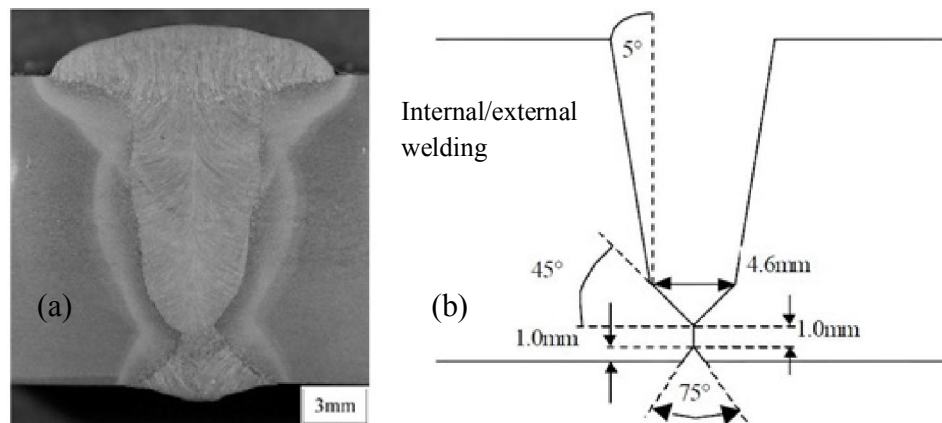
(a) Cranfield automated pipe welding system's macro-section and (b) weld bevel from weld in 14.9 mm wall X100 pipeline [16, 55]
